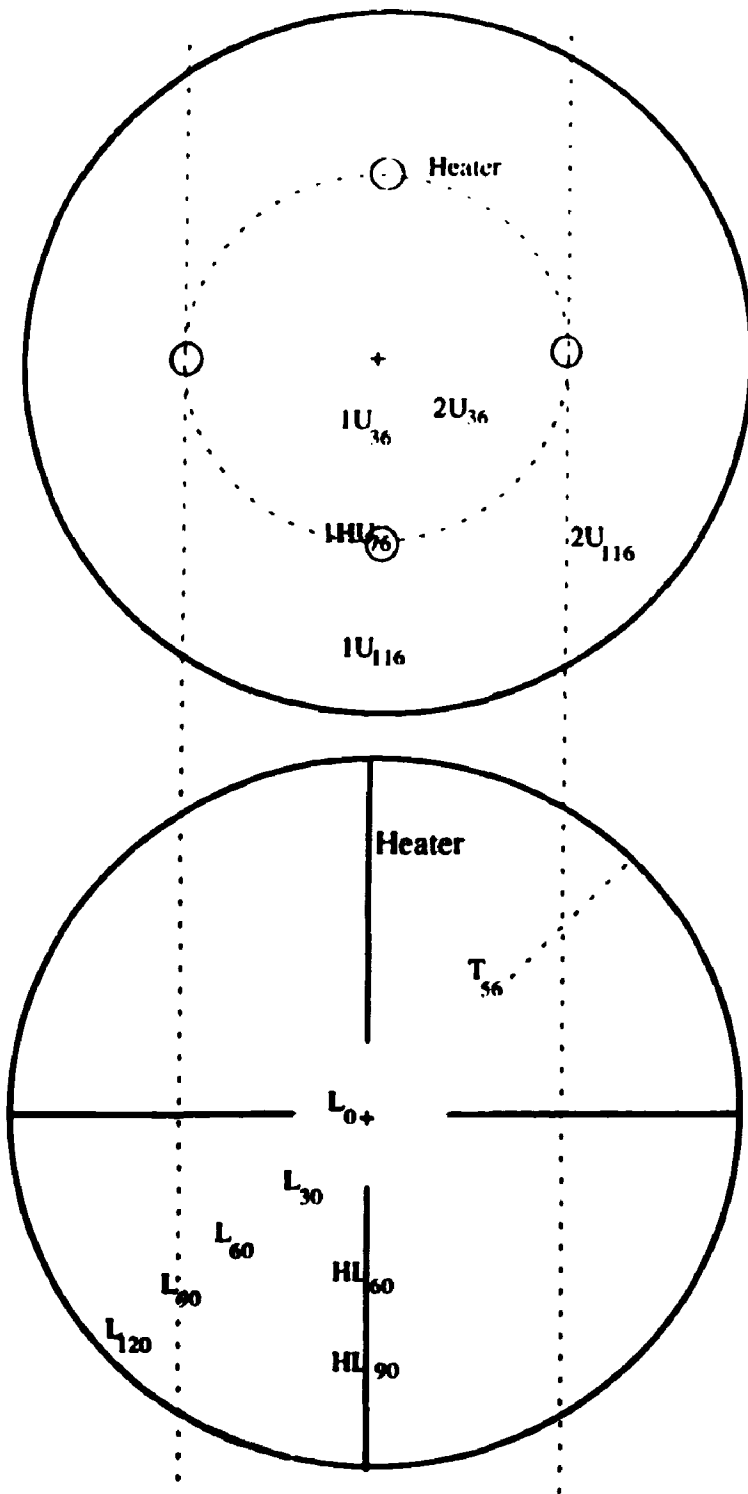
Locations of thermocouples on the upper and lower surfaces of the mold cavity.
